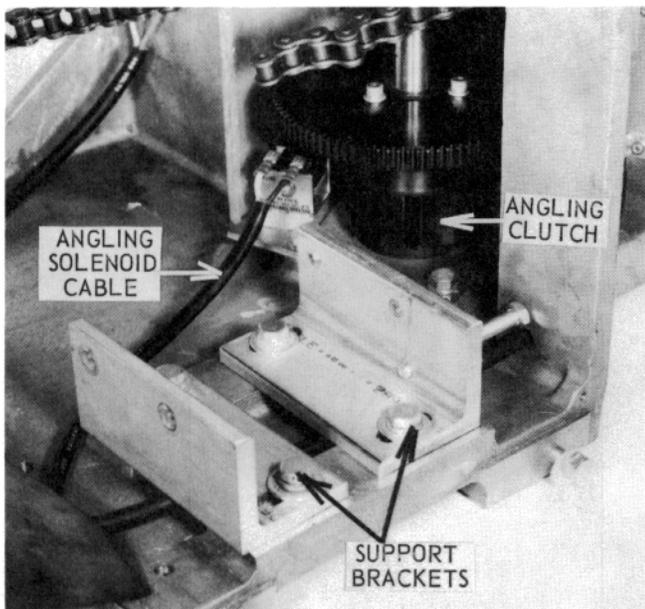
Angling Solenoid Cable, Angling Clutch, and Speed Reducer Brackets
